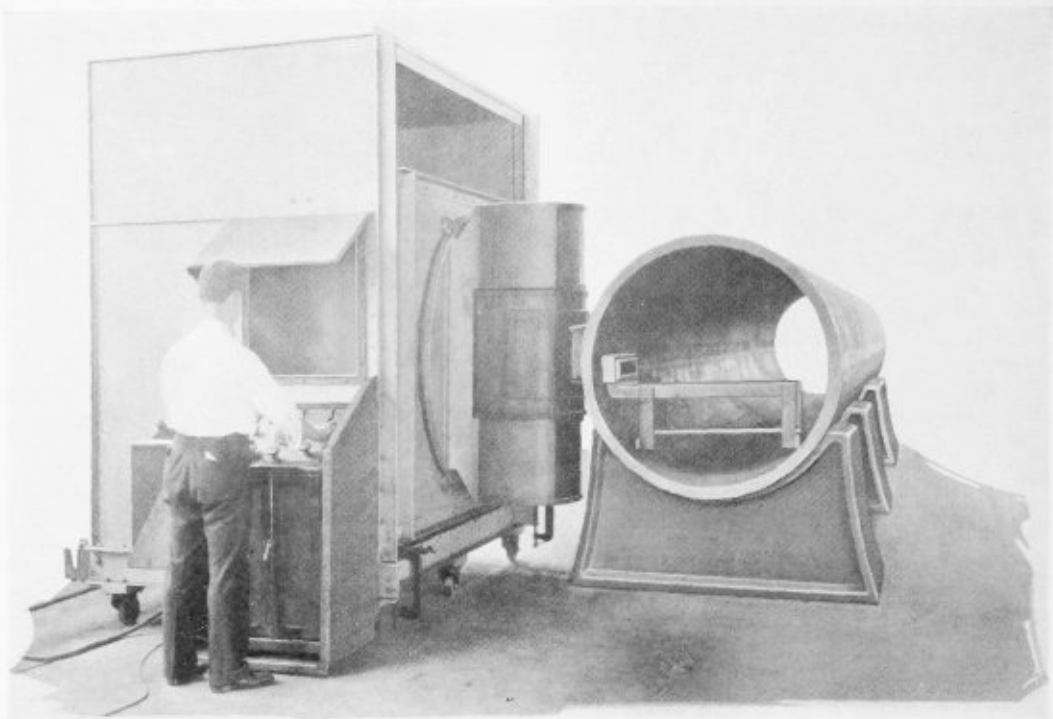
One of the first X-ray machines for examining welded joints
